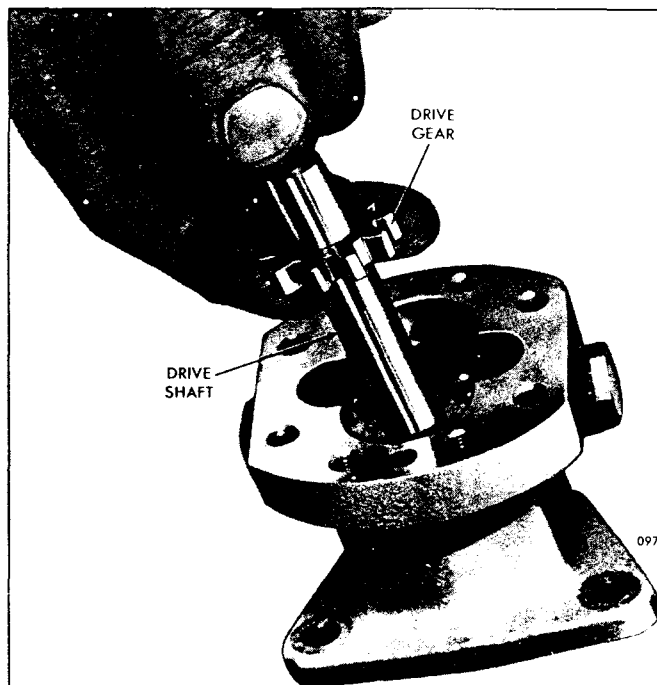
Installing Fuel Pump Drive Shaft and Gear Assembly
